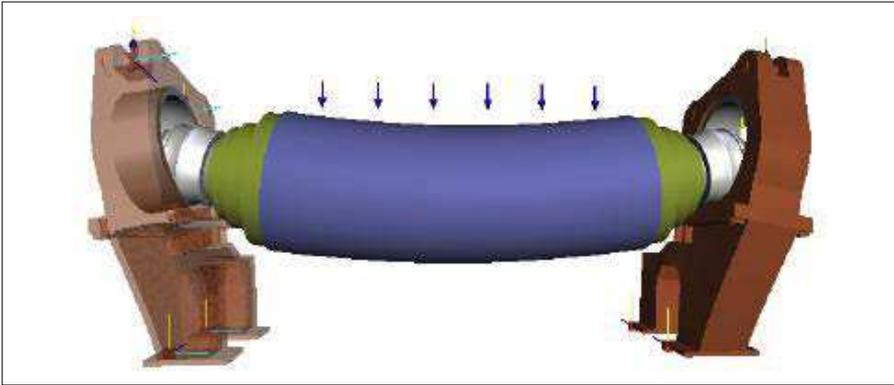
Advanced bearing calculations made for a high loaded plain press roll with two spherical roller bearings. Internal axial loads are causing the frames to bend.
